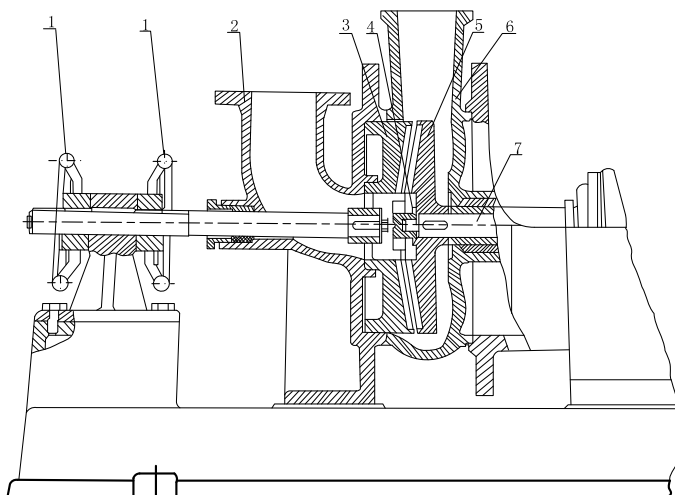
The structure of disk mill: 1—adjustment wheel, 2—feed port, 3—fixed disk, 4—transmission turbine, 5—rotating grinding, 6—discharge port, and 7—drive shaft
